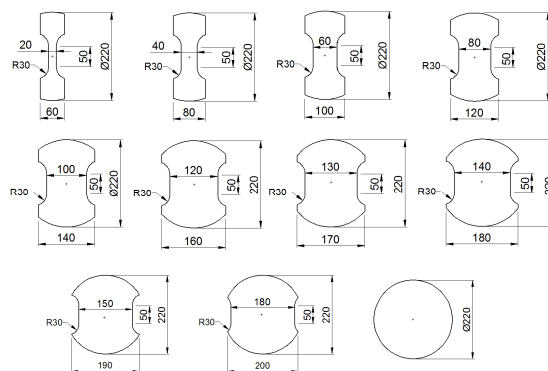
Forming Limit Curve blank geometries and dimensions (mm)
